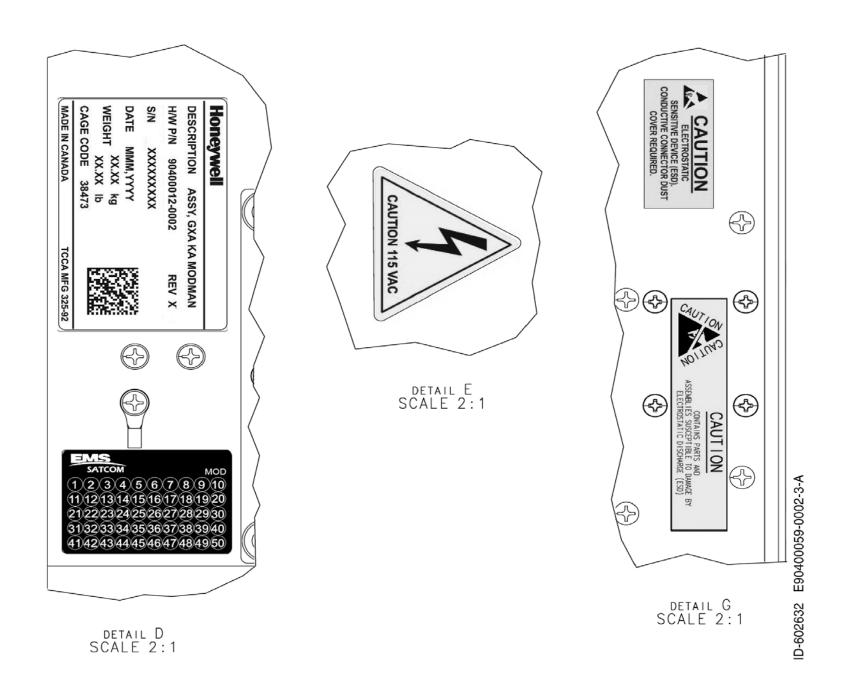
(Sheet 3 of 4) Modman Outline and Installation Drawing Variant 2 (90400059-0002, REV A)
